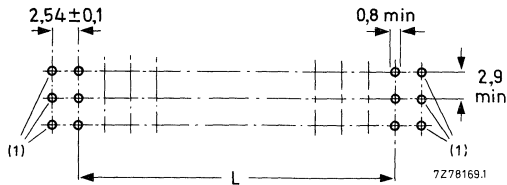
Hole pattern for double-row panel sockets. See Table 2, pages 10 and 11 for dimension L.
